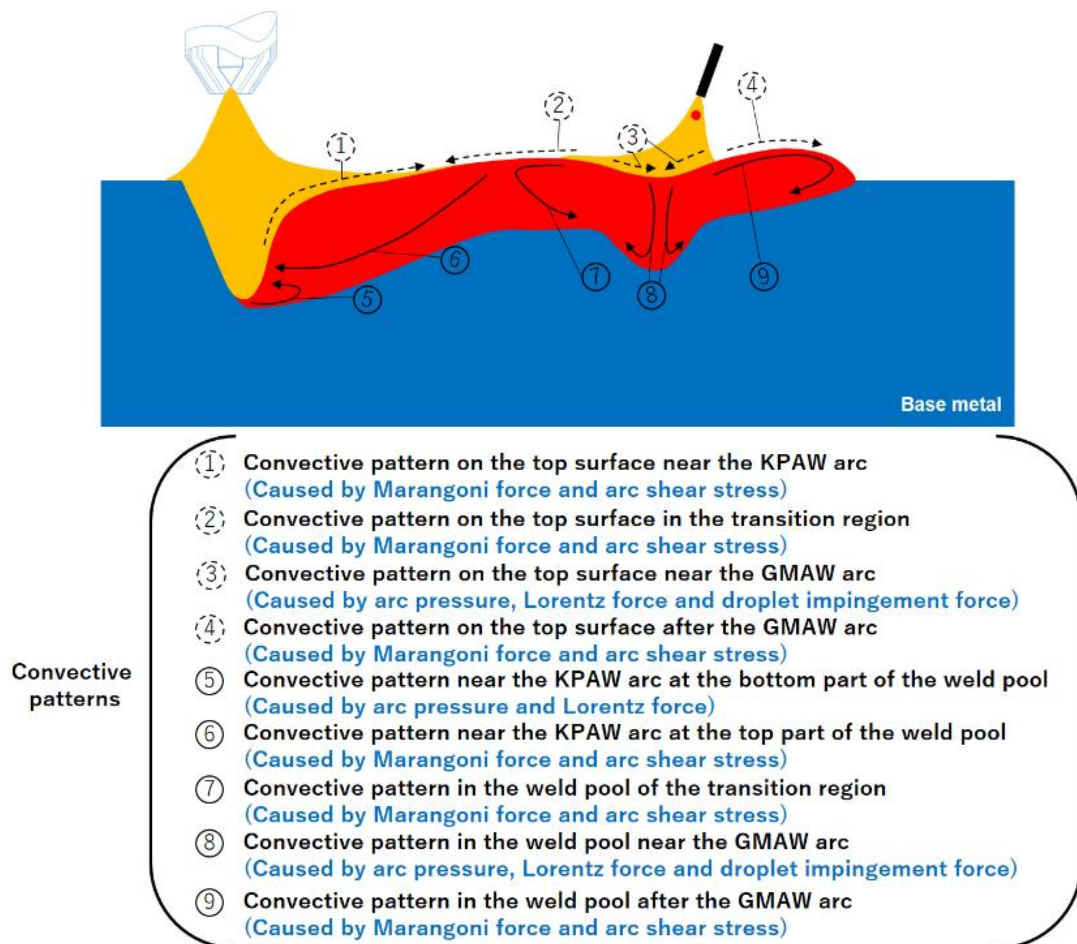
The convective patterns in the hybrid KPAW-GMAW weld pool
